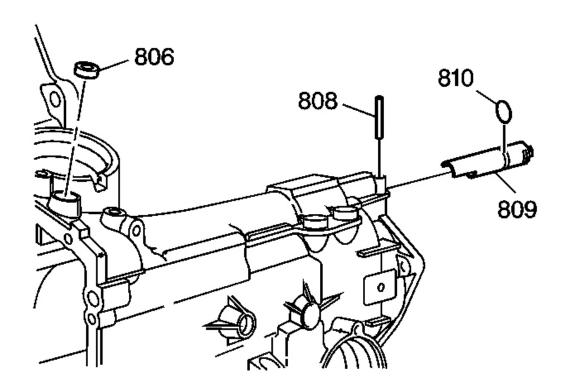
Locating Park Pawl Actuator Components Courtesy of GENERAL MOTORS CORP.
